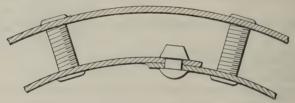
Proper Location of Staybolts Adjacent to Longitudinal Joint in Furnace Sheet
